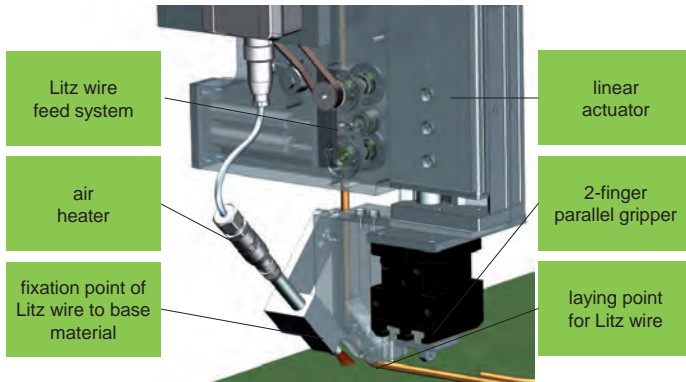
HF-Litz wire laying tool with hot-air tool to fix the HF-Litz wires to a base material.
